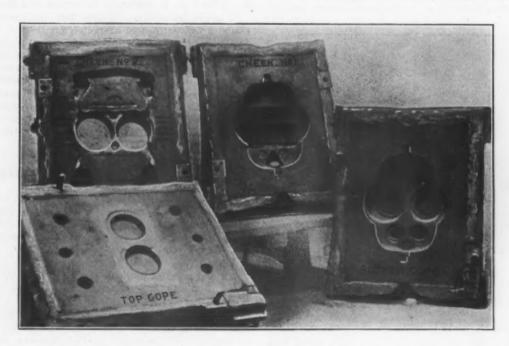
The Parts of the Mold Exclusive of Cores.
